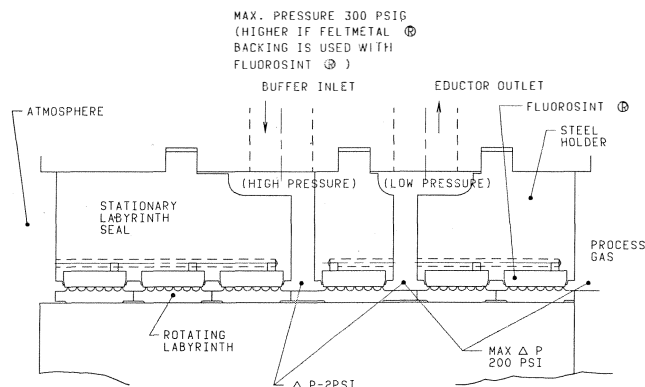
Special Purpose Centrifugal Compressor Shaft-End Seal.
